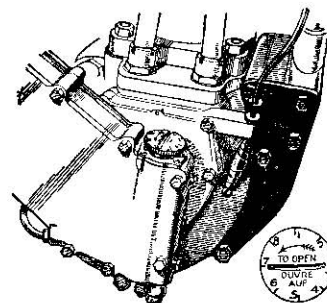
SHOWING THE OIL REGULATOR PROVIDED ON THE 1932-6 MECHANICAL LUBRICATION MODELS
